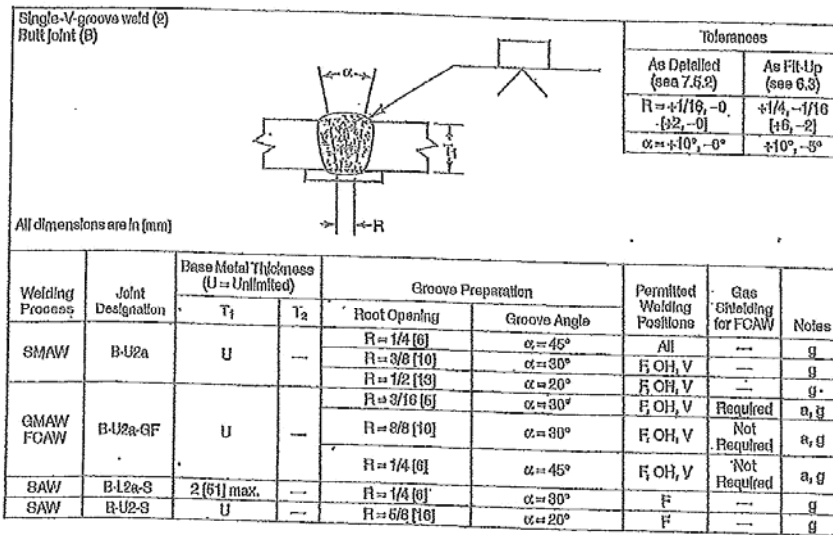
B—Prequalified Complete Joint Penetration (CJP) Groove Welded Joint Details
